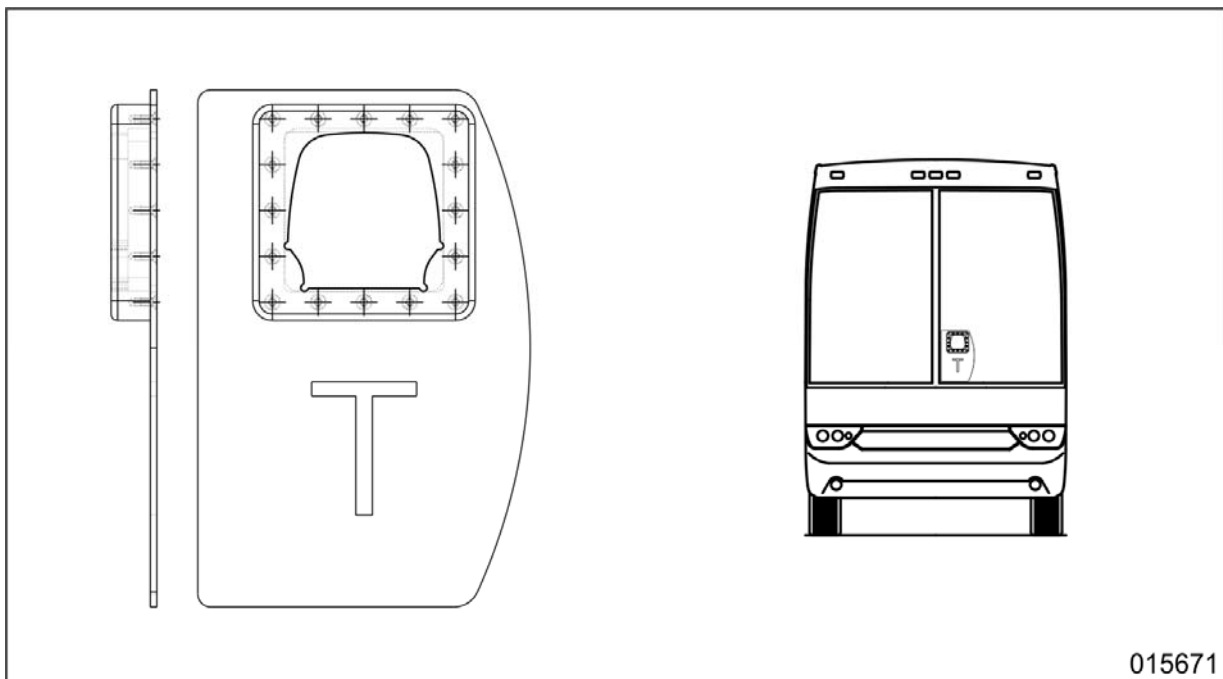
Caliper VH91400409 to position LDW2 camera at the inside of the windshield
